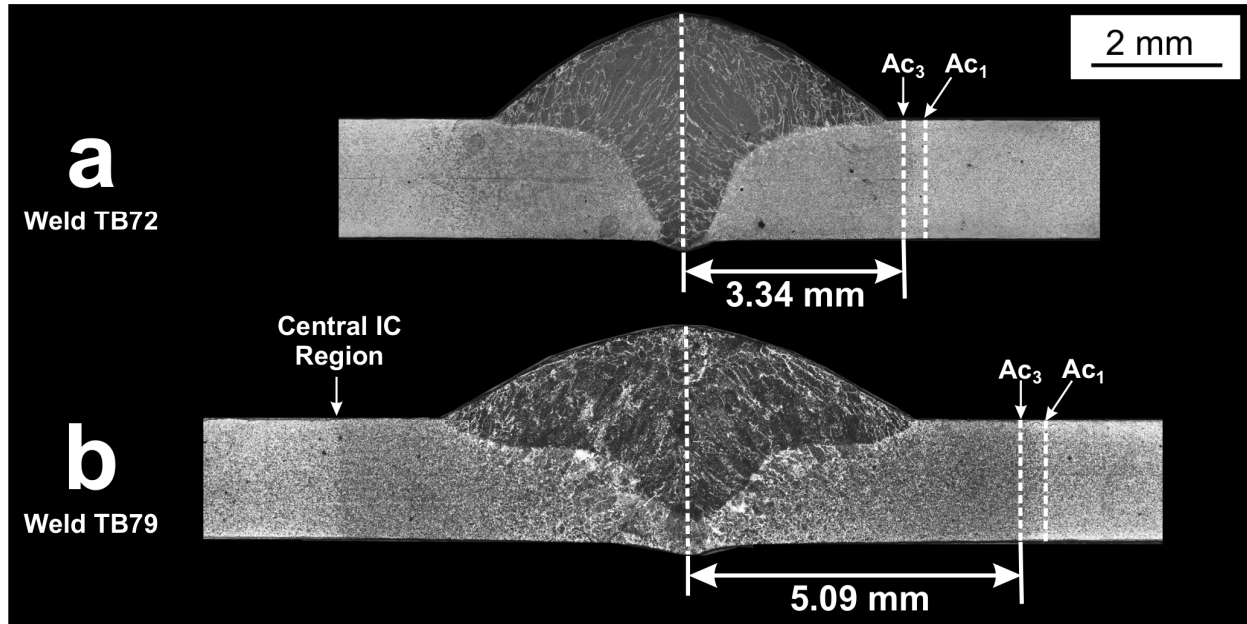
Example images that were used for the HSLA '17s' sheet steel HAZ measurements of the half-width distances from the weld centerline to the Ac_3 line. Shown is a) the lowest heat input weld, TB72, and b) the highest heat input weld, TB79.
